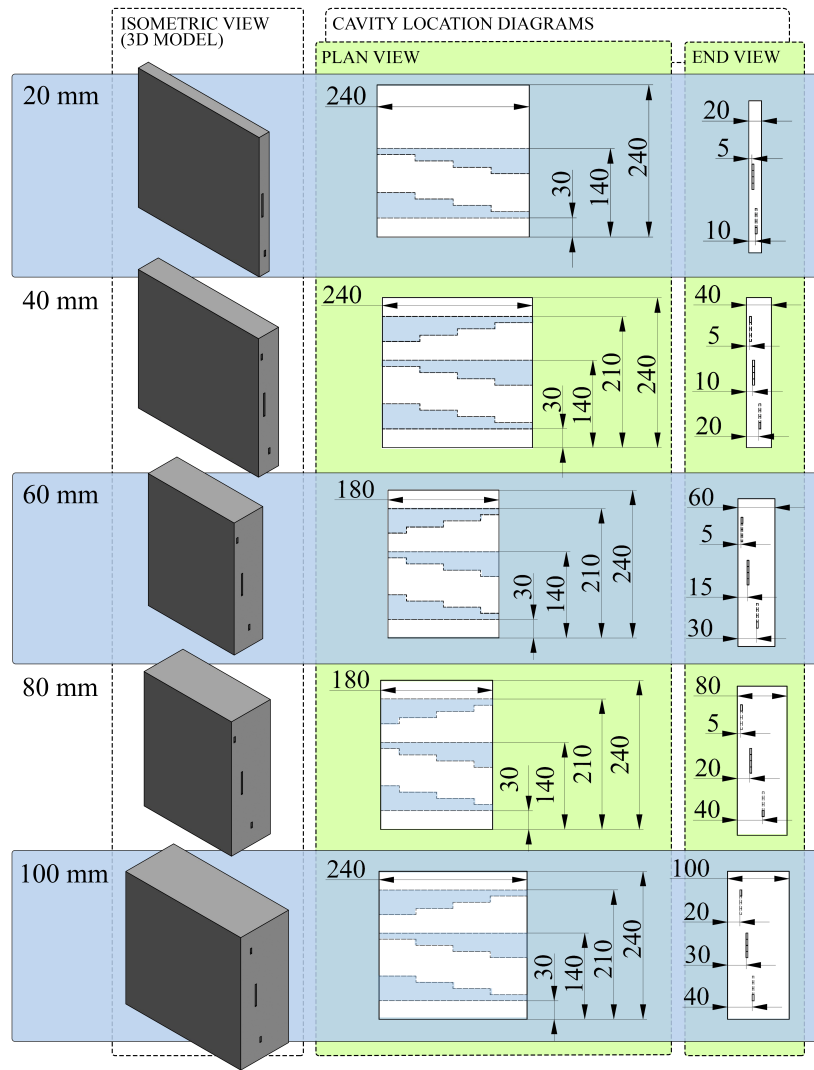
Plate geometry and cavity location diagrams (all dimensions in mm).
